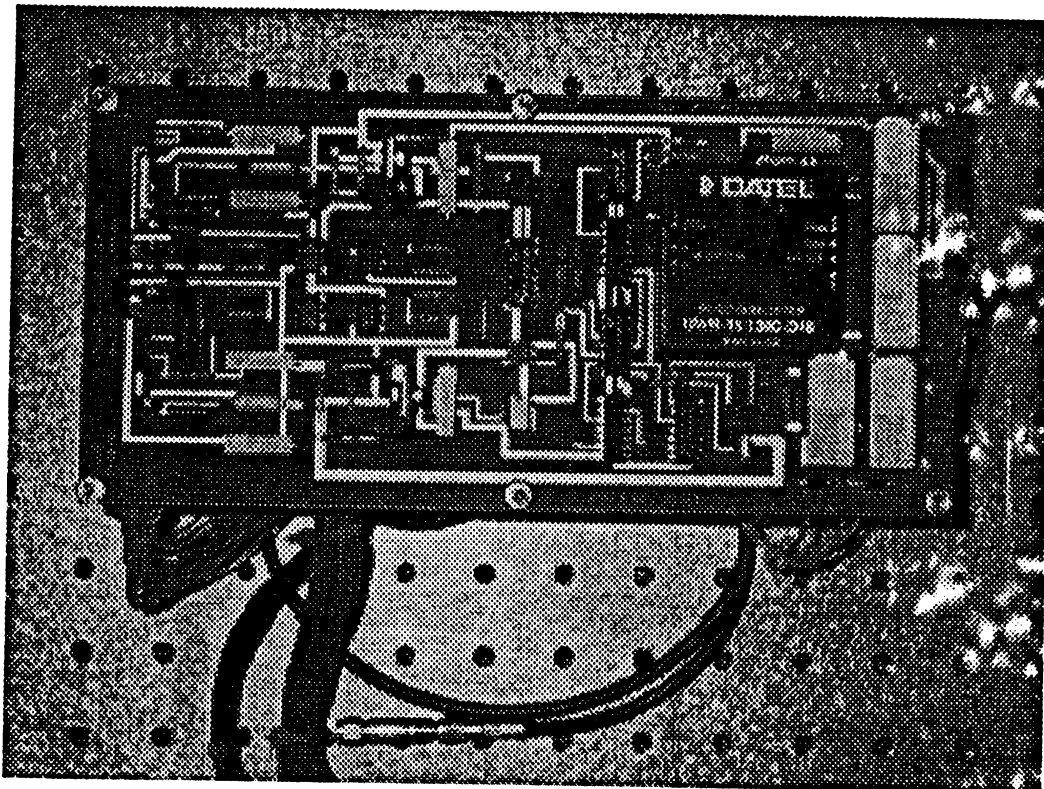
SAPARC Control Printed Wiring Assembly (Stuffed)
